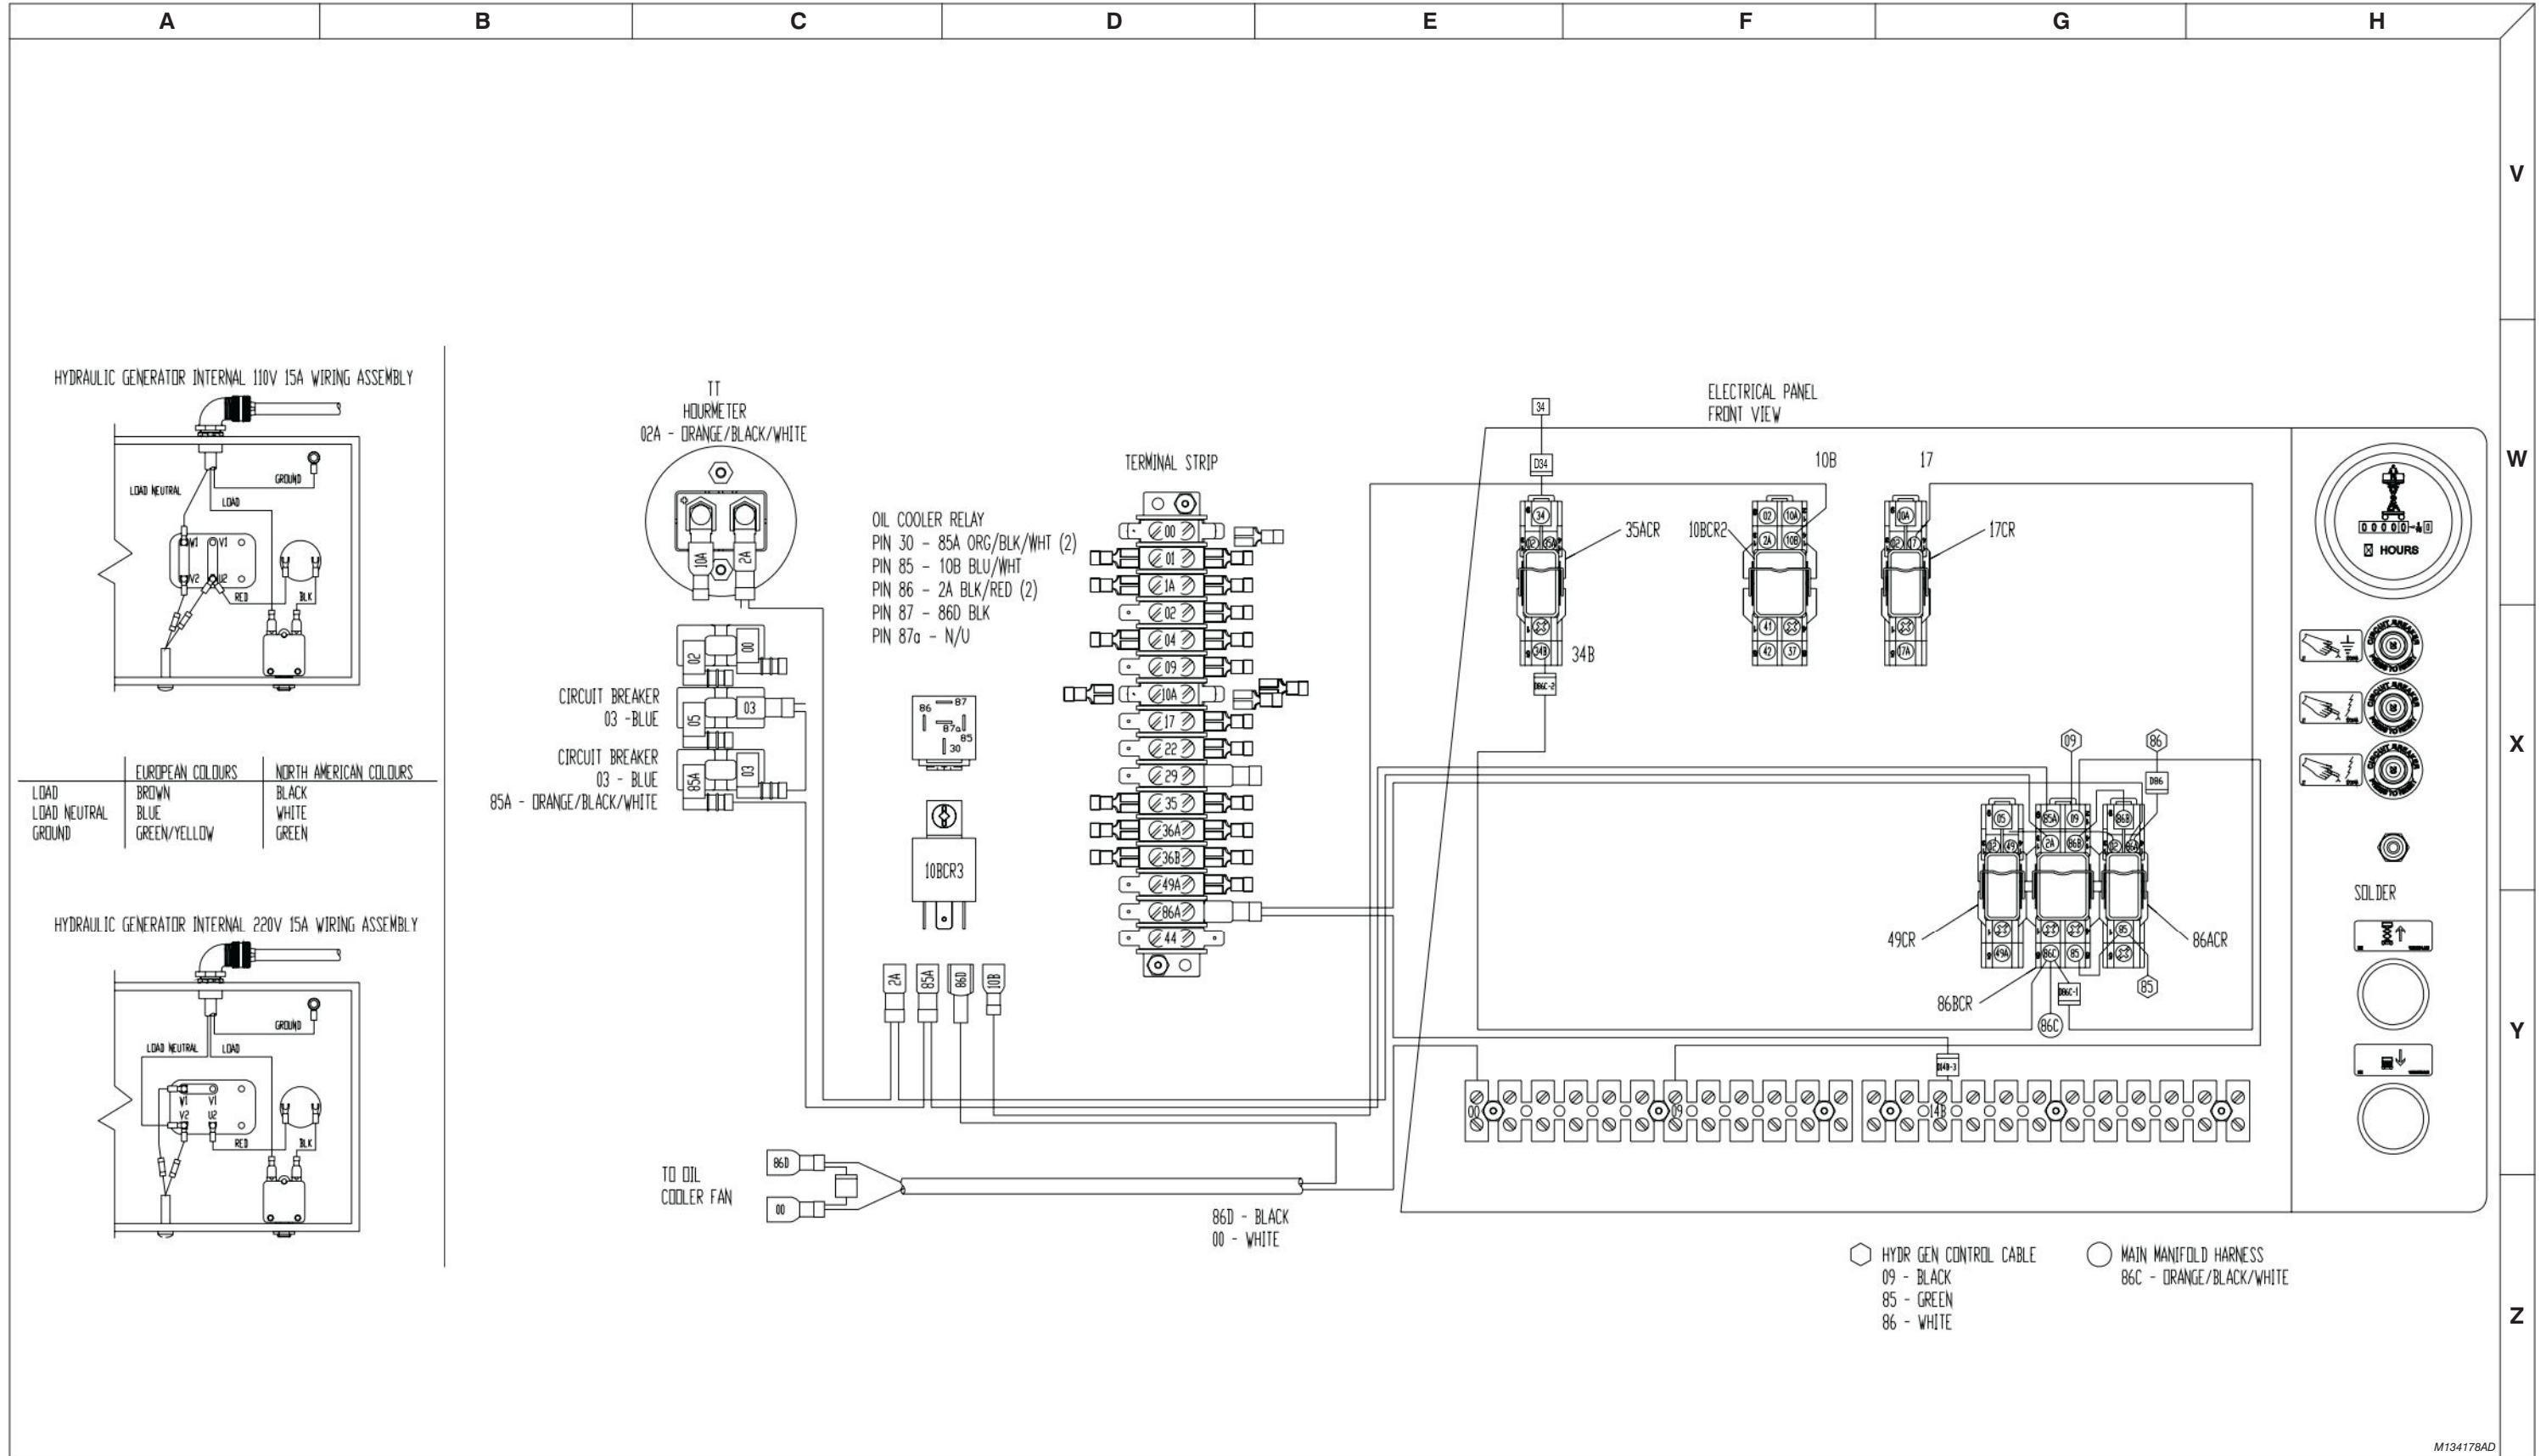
Oil Cooler Related Components and Electrical Panel Wiring Diagram (Nissan Engine Without Hydraulic Generator Option)
